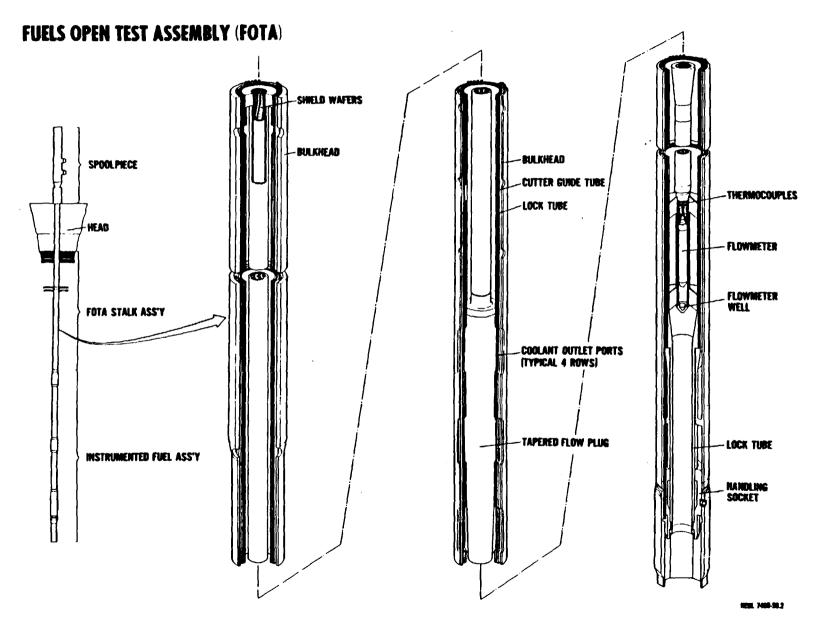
E.12. FFTF fuels open test assembly (FOTA).
